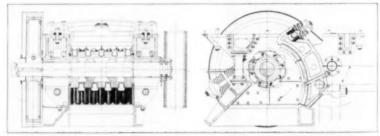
Sectional elevation of 36- \times 60-in. single-roll crusher, Fairmount type
